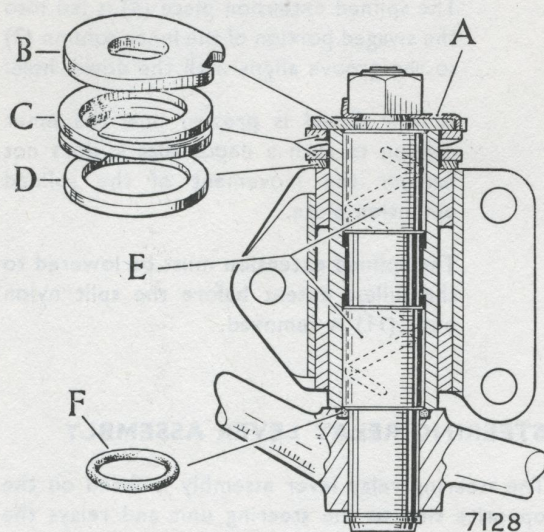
Cross section view through steering relay lever assembly, note the position of the lubrication groove in the bush bearings.
